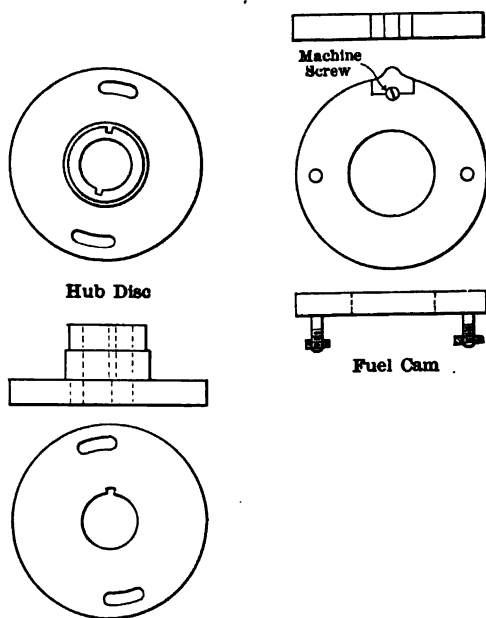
Allis-Chalmers Diesel fuel cam.
